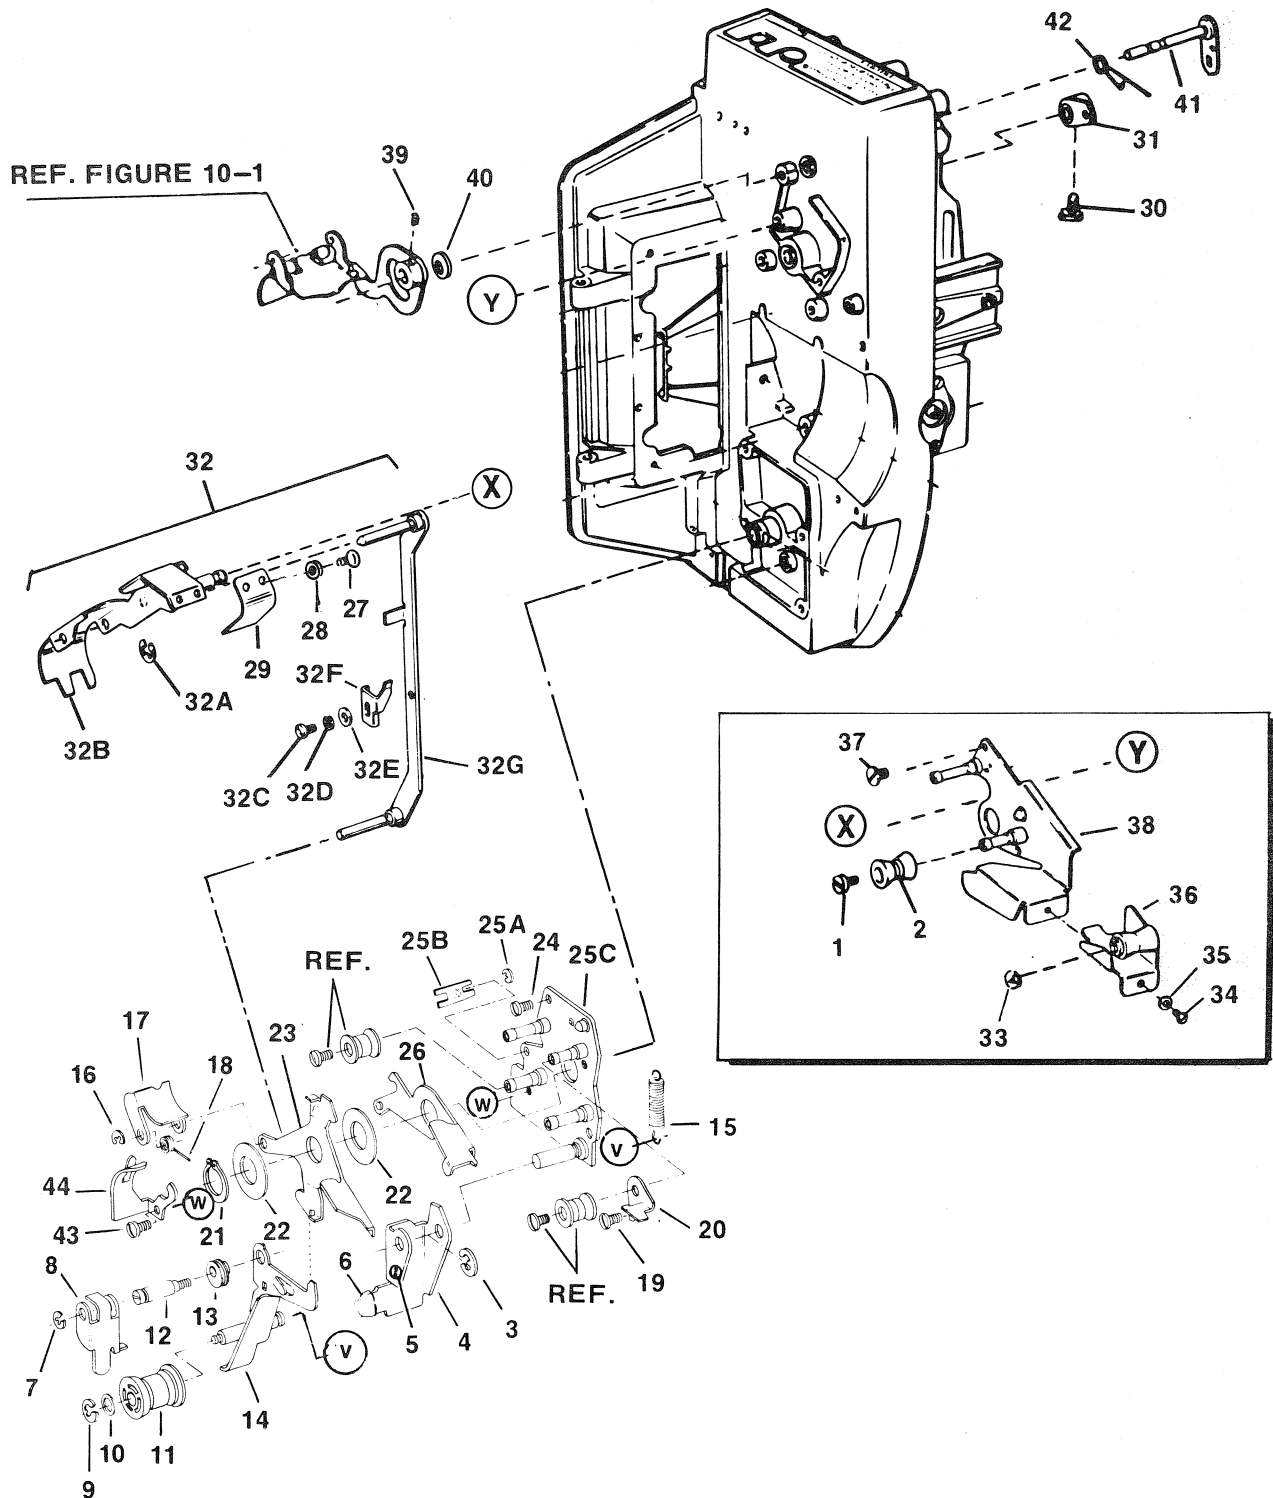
MECHANISM ASSEMBLY VIEW II
